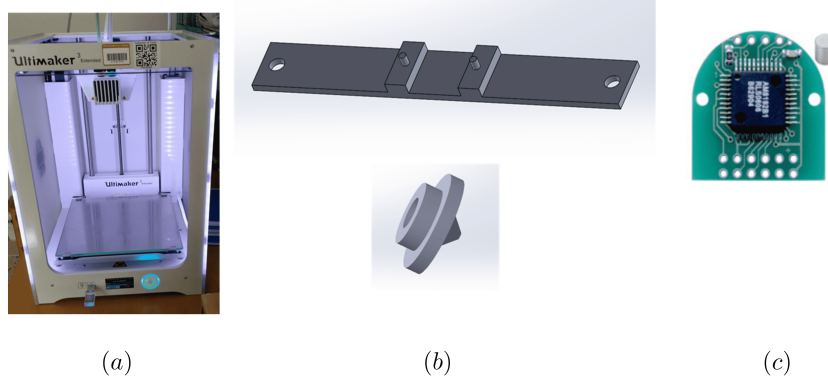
(a) 3D printer Ultimaker 3; (b) Solid Works 3D print design for magnetic encoder adapters; (c) RLS AM8192B Hall sensor-based magnetic incremental encoder.
